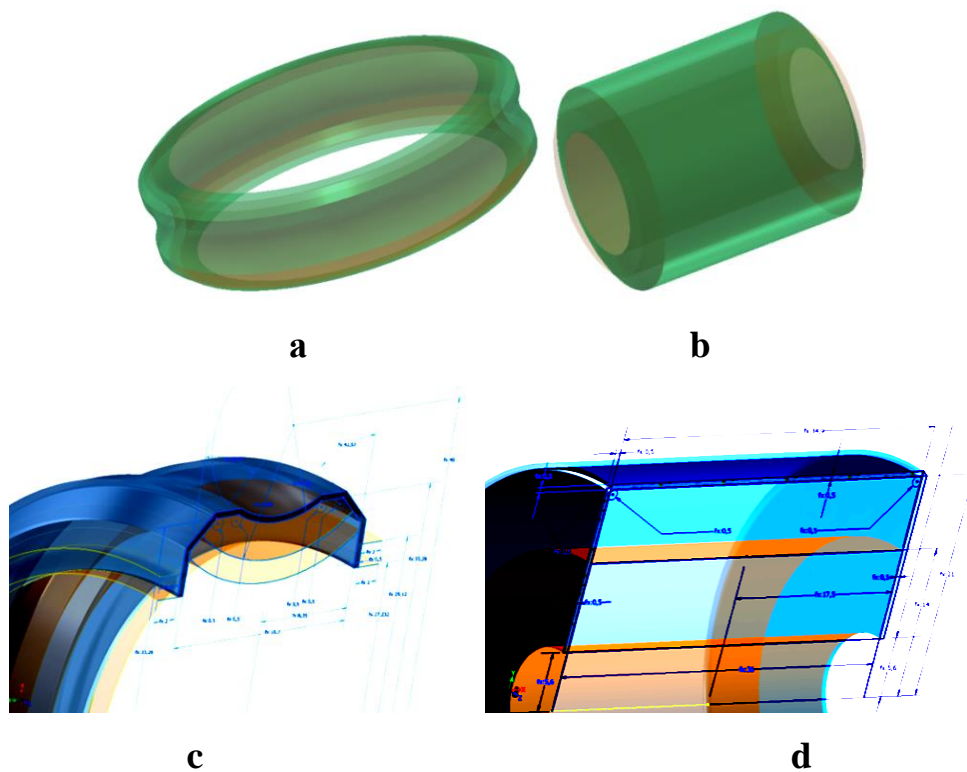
Parametric 3D models: a - "worm gear shell"; b - "worm shell"; sketch profile: c - "worm gear shell"; d - "worm shell"
